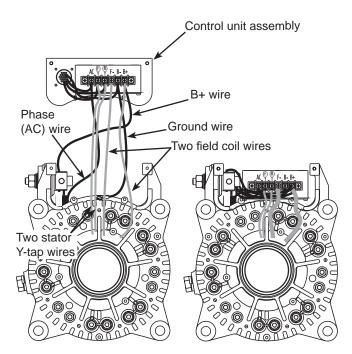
Replacing Control Unit Assembly and/or B+ Terminal on N1388 Alternator
